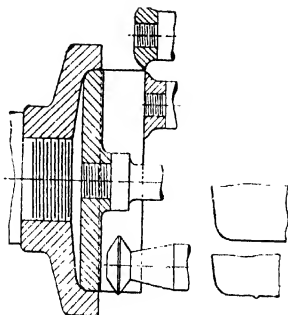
TRIMMING AND MARKING A COVER IN A SPECIAL LATHE
